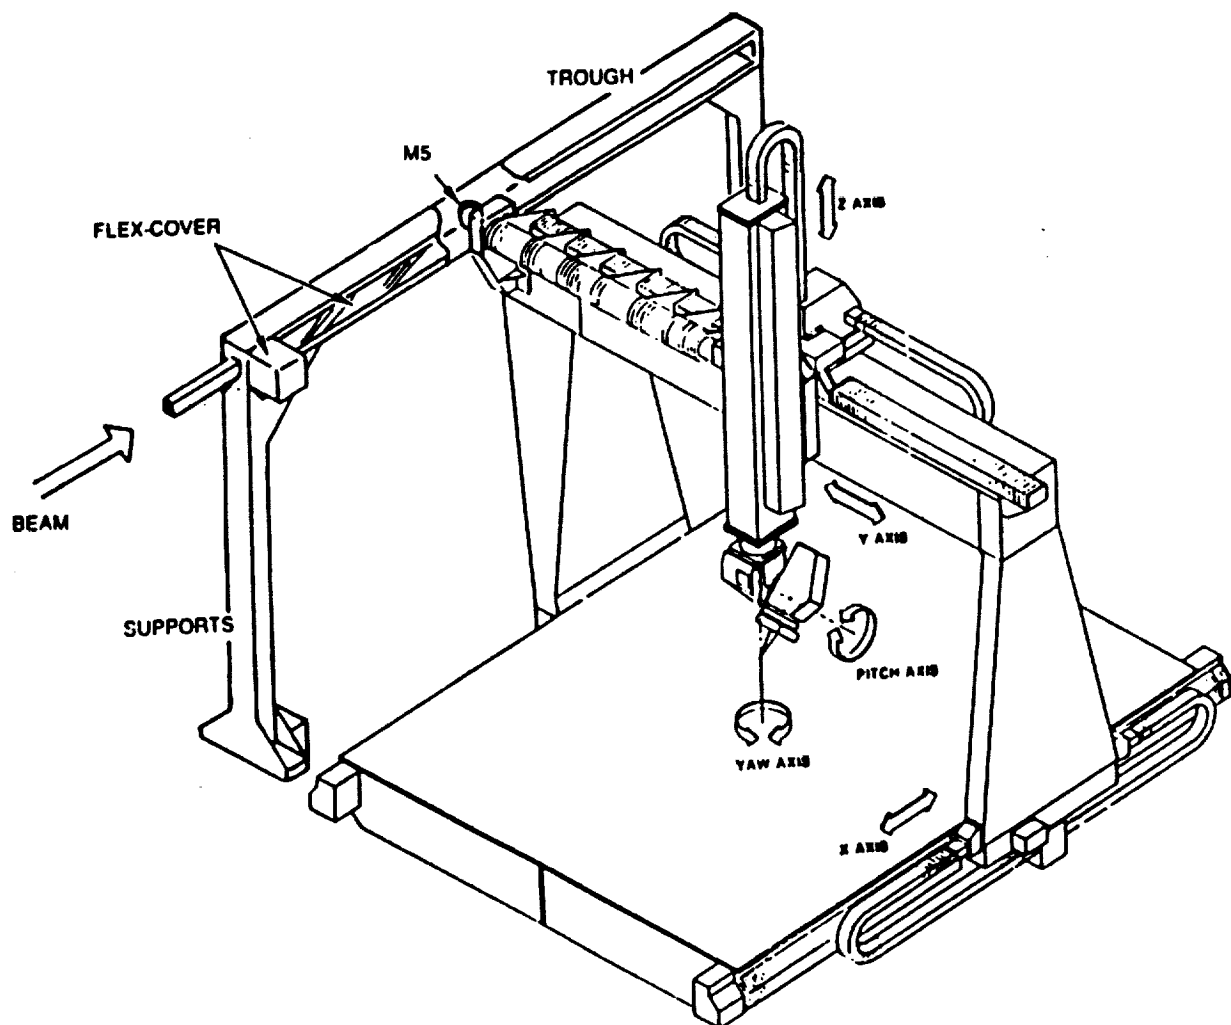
Schematic of Laser Articulating Robotic System (LARS) Used for Laser Beam Welding Program.
